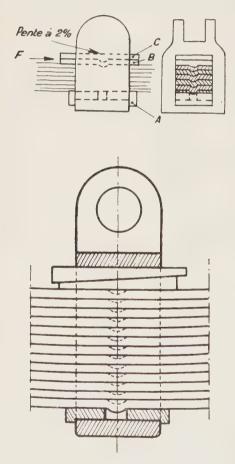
and 18. — Cold buckling springs packing piece S. N. C. F. Process A. — A. Wedge. —
